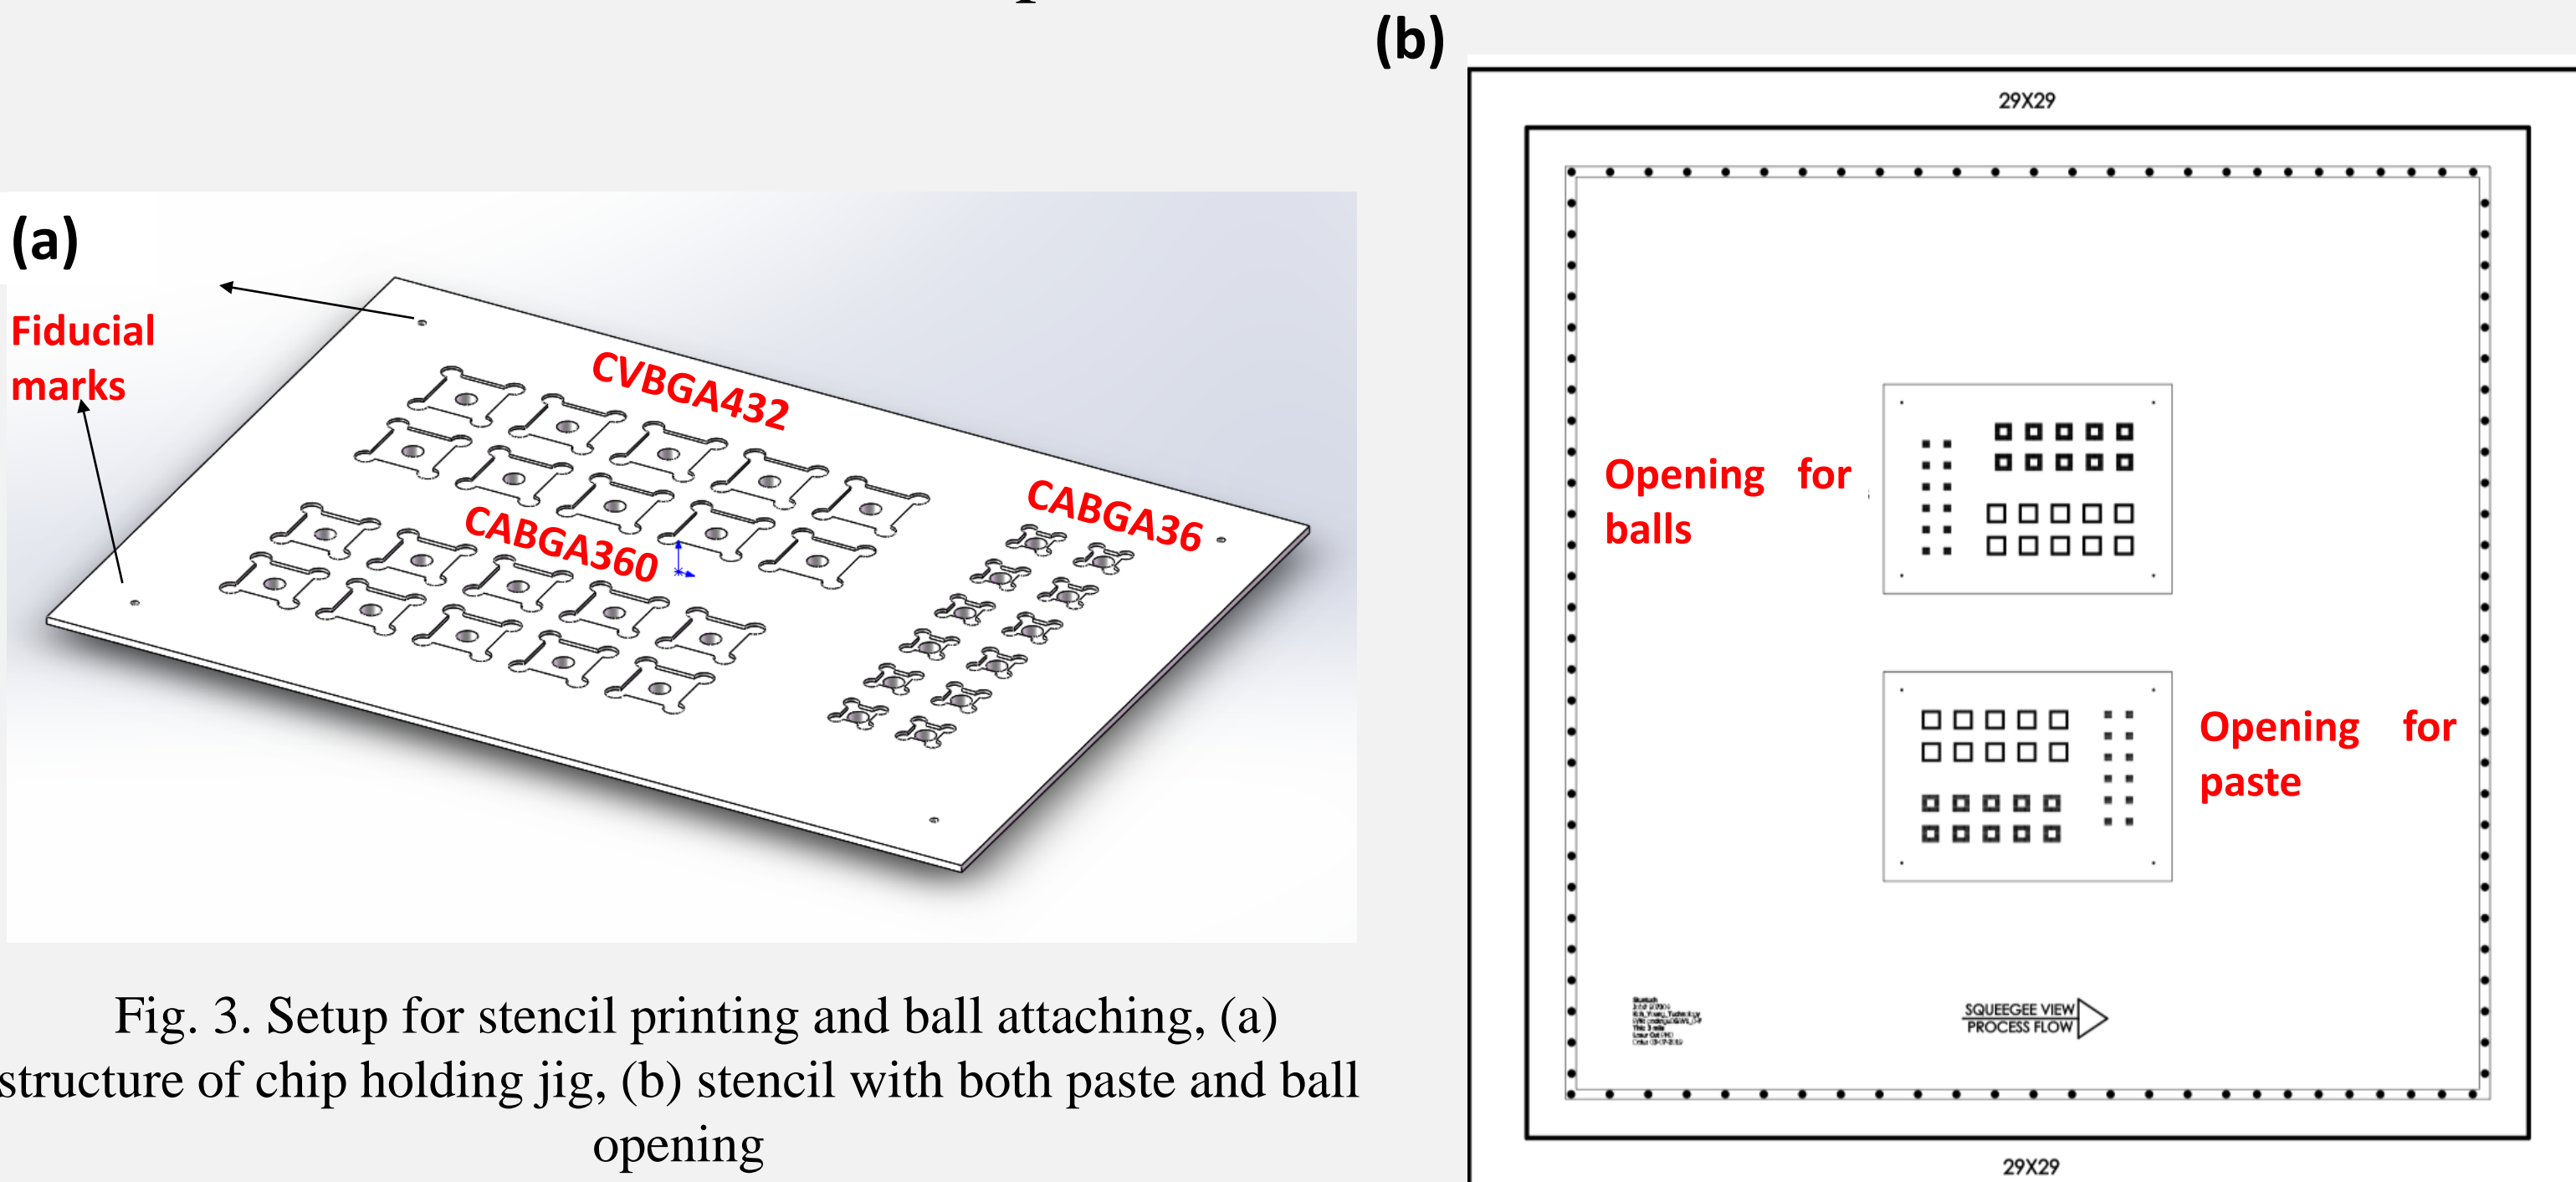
Setup for stencil printing and ball attaching, (a) structure of chip holding jig, (b) stencil with both paste and ball opening
